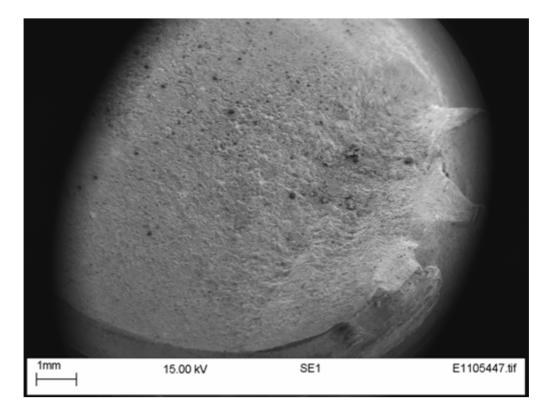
SEM fractograph, showing fracture origin region of a sample from the 45° shear like fracture.
